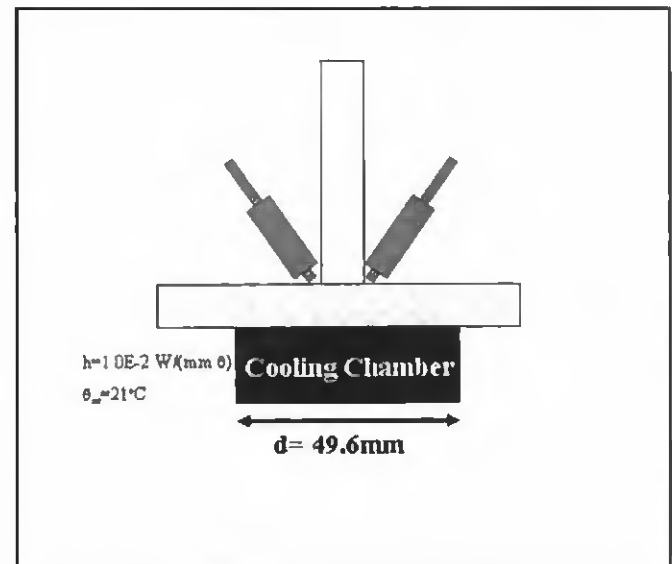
Scheme of heat sinking applied to the T-joint.
